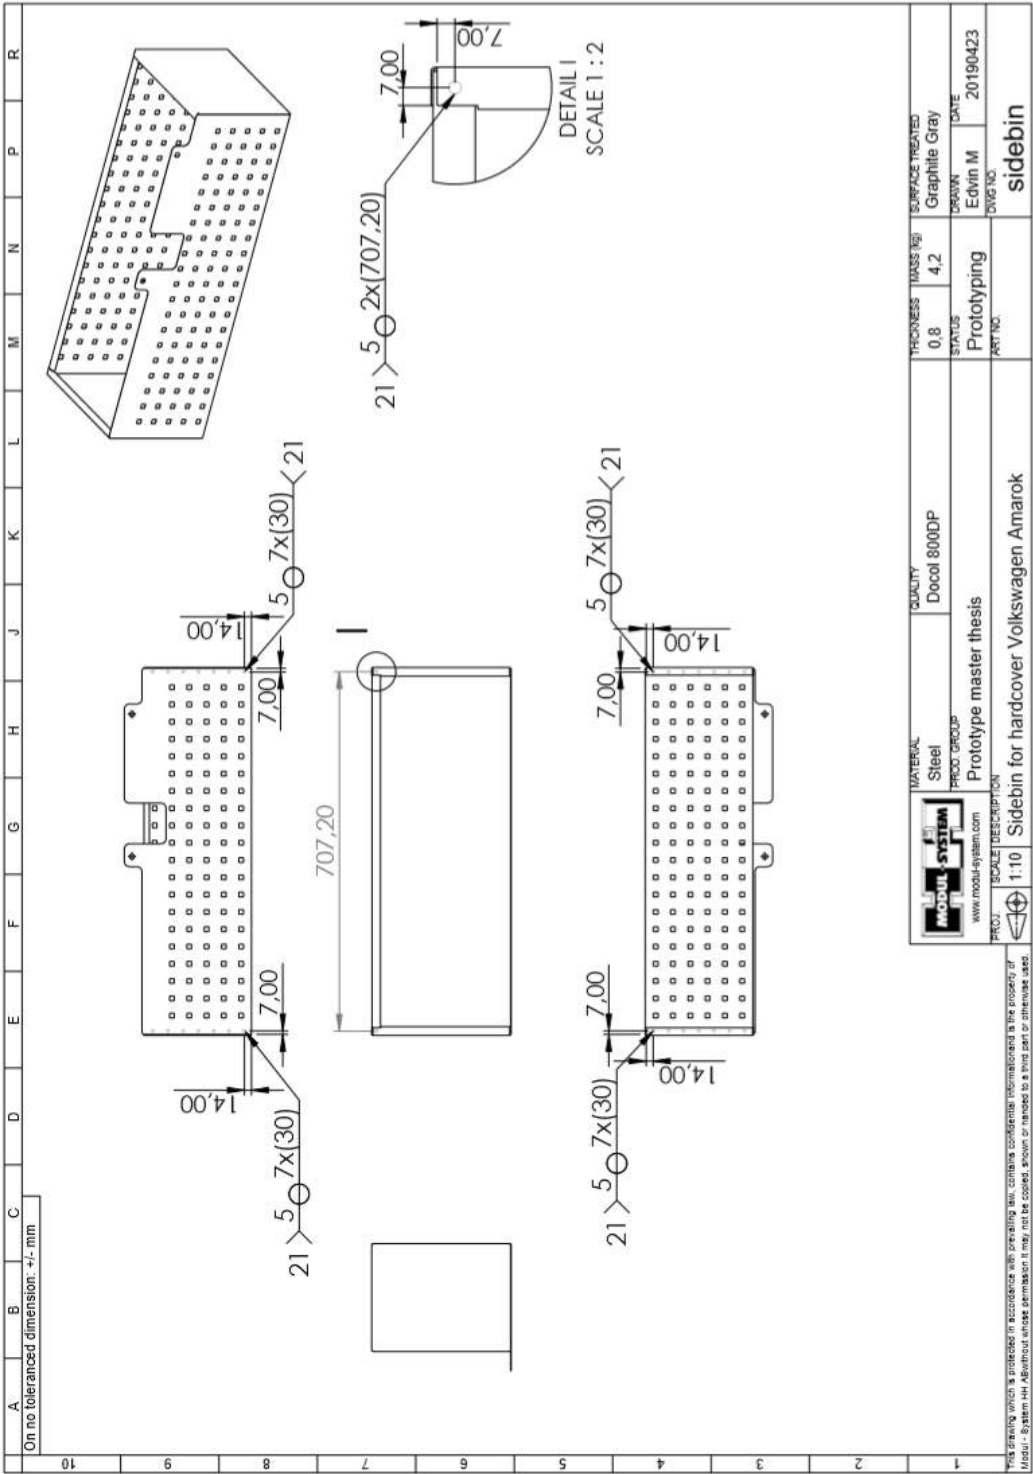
Weld drawing of the shallow Storage Compartment.
